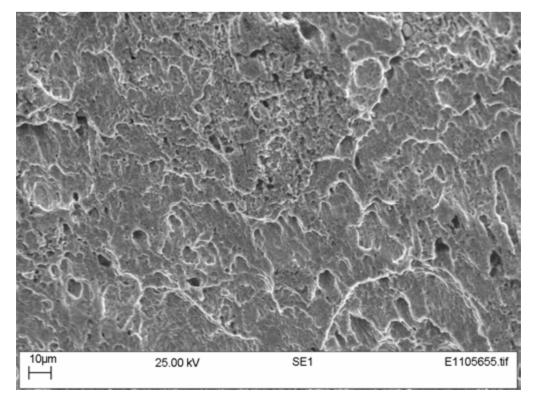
SEM fractograph, showing detail of figure 25 and fractography consistent with high ductility shear fracture.
